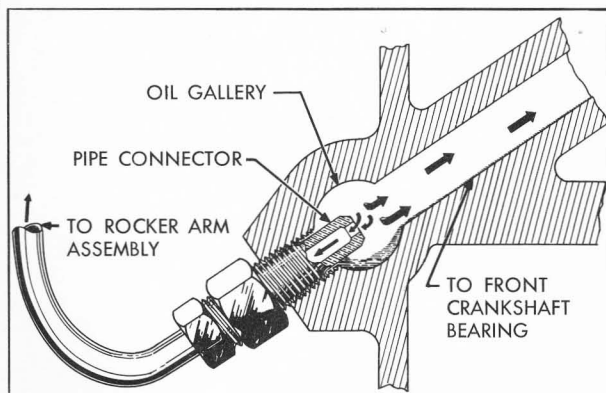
Sectional View of Oil Pipe Connection to Oil Gallery
